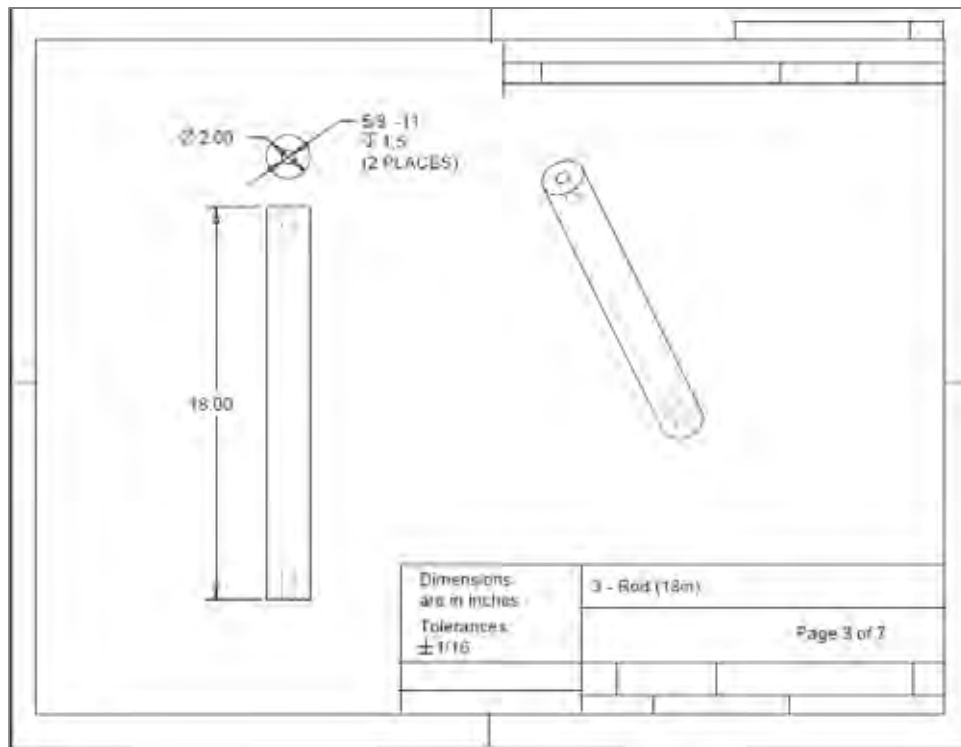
Fixture Support Rod for Normal Penetration Test Setup
